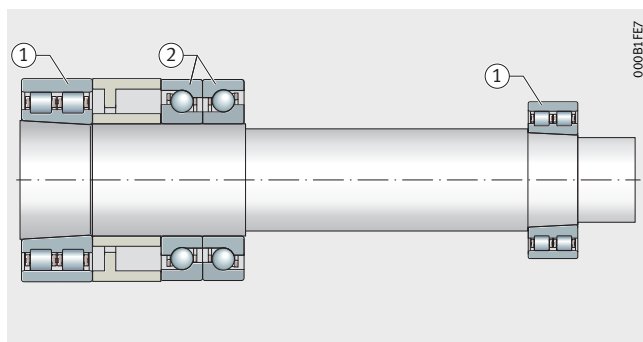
Higher spindle performance in a bearing combination for a turning spindle:
